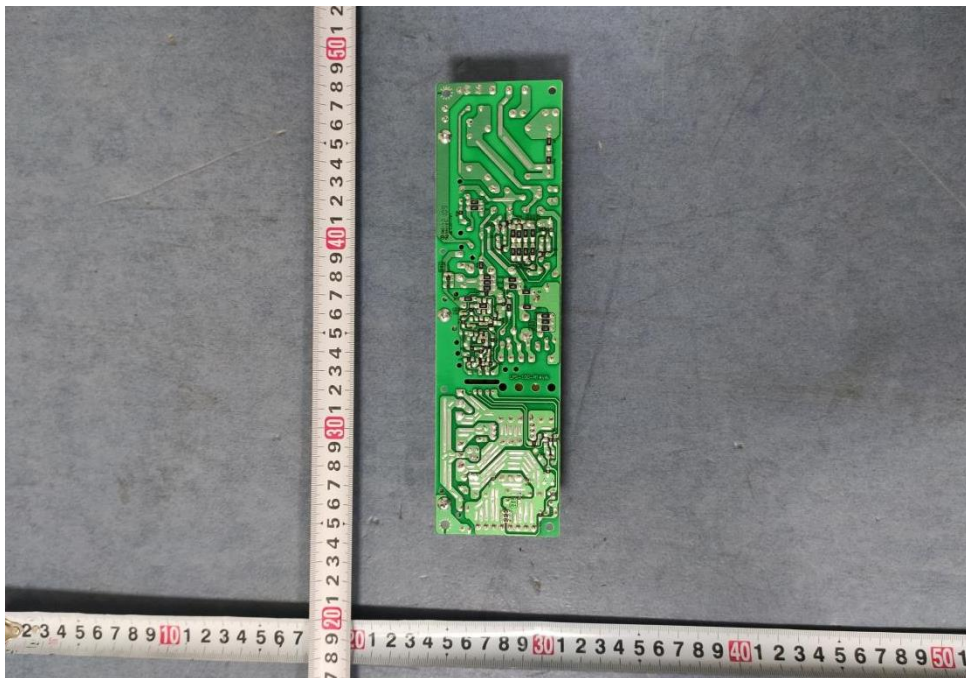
AC-DC (Solder side view for S1000-200L-C)
